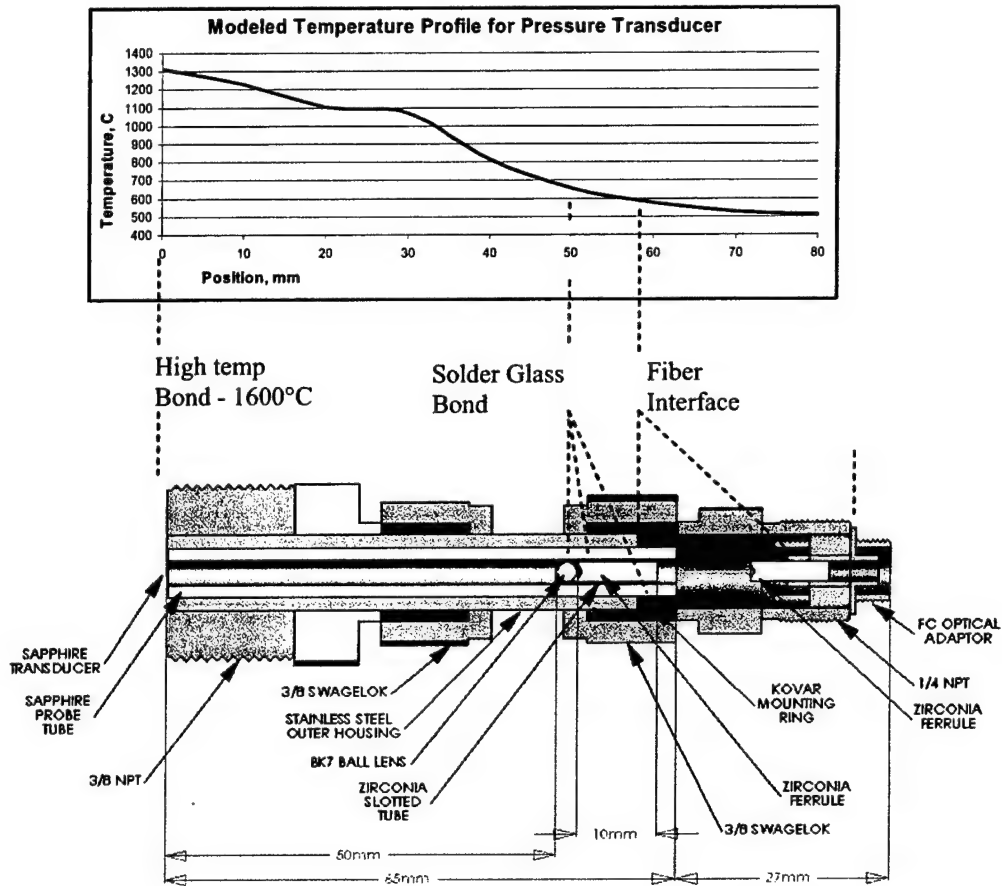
Sketch of the proposed pressure sensor, including locations and expected operating temperatures for the various packaging materials. Upcoming designs will also include high-temperature mechanical fittings.
